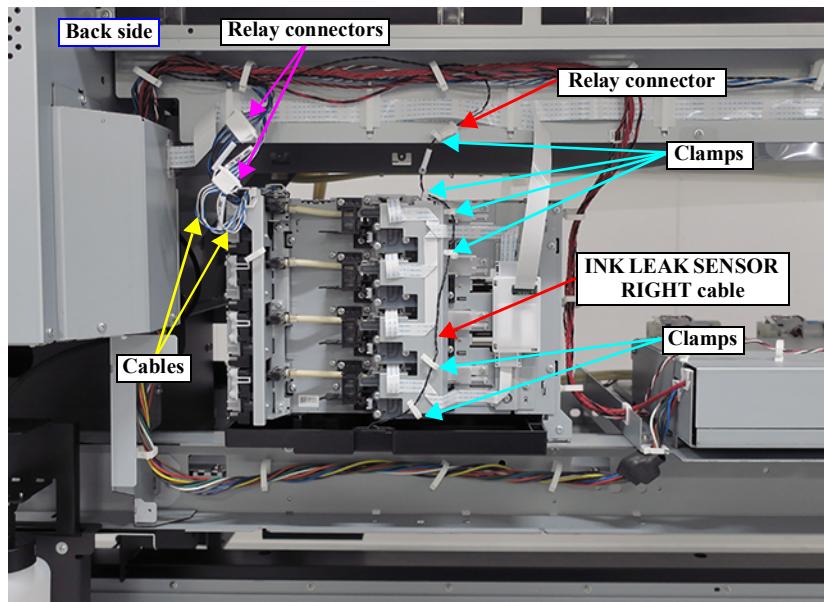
Removing the INK HOLDER RIGHT (1)
